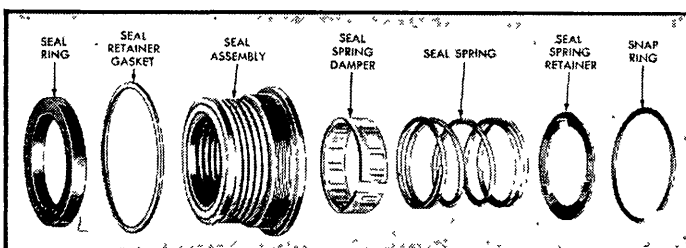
A Exploded view of bellows type seal, 1939-52 Fig. 40B Exploded view of housing type seal for fluid drive, 1939-52
